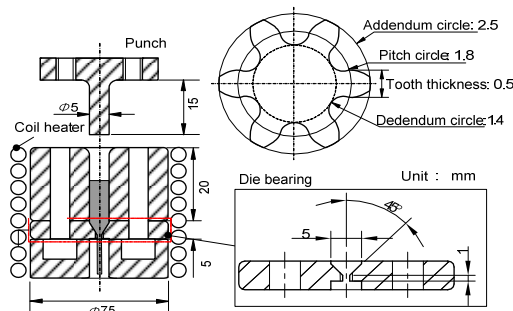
Shapes and dimensions of the spur gear and extrusion die
